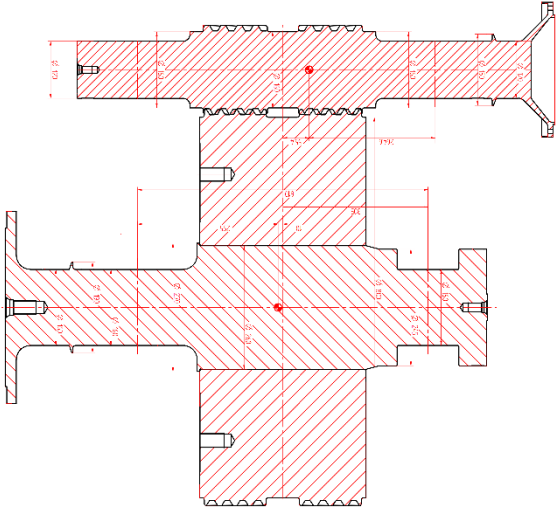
The cross-sectional drawing of the gear shafts, considered in this paper.
